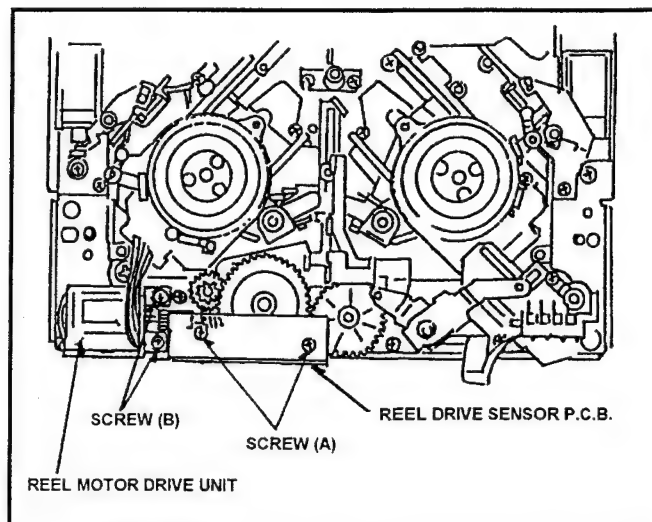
Removal of Reel Drive Motor Unit
